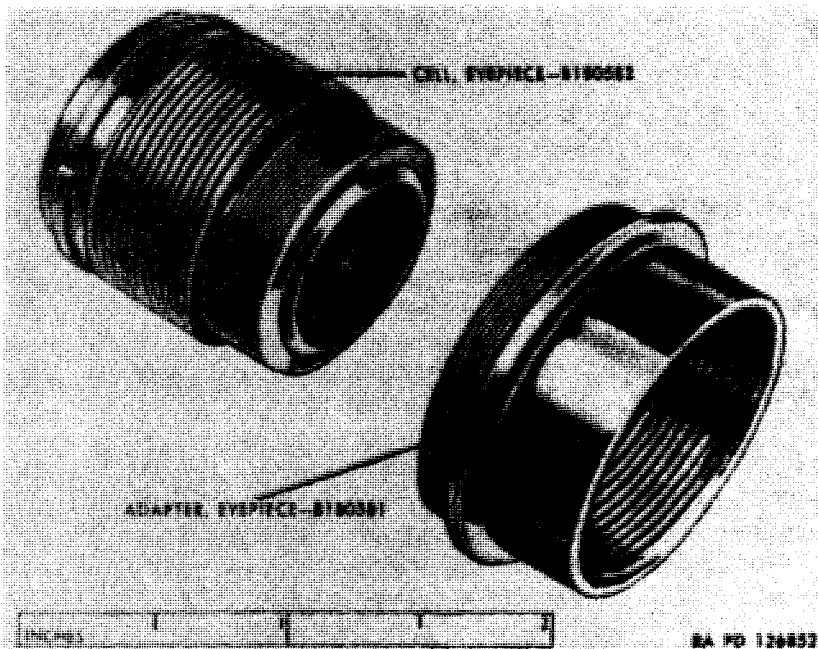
Eyepiece cell assembly 7637438 - exploded view.
